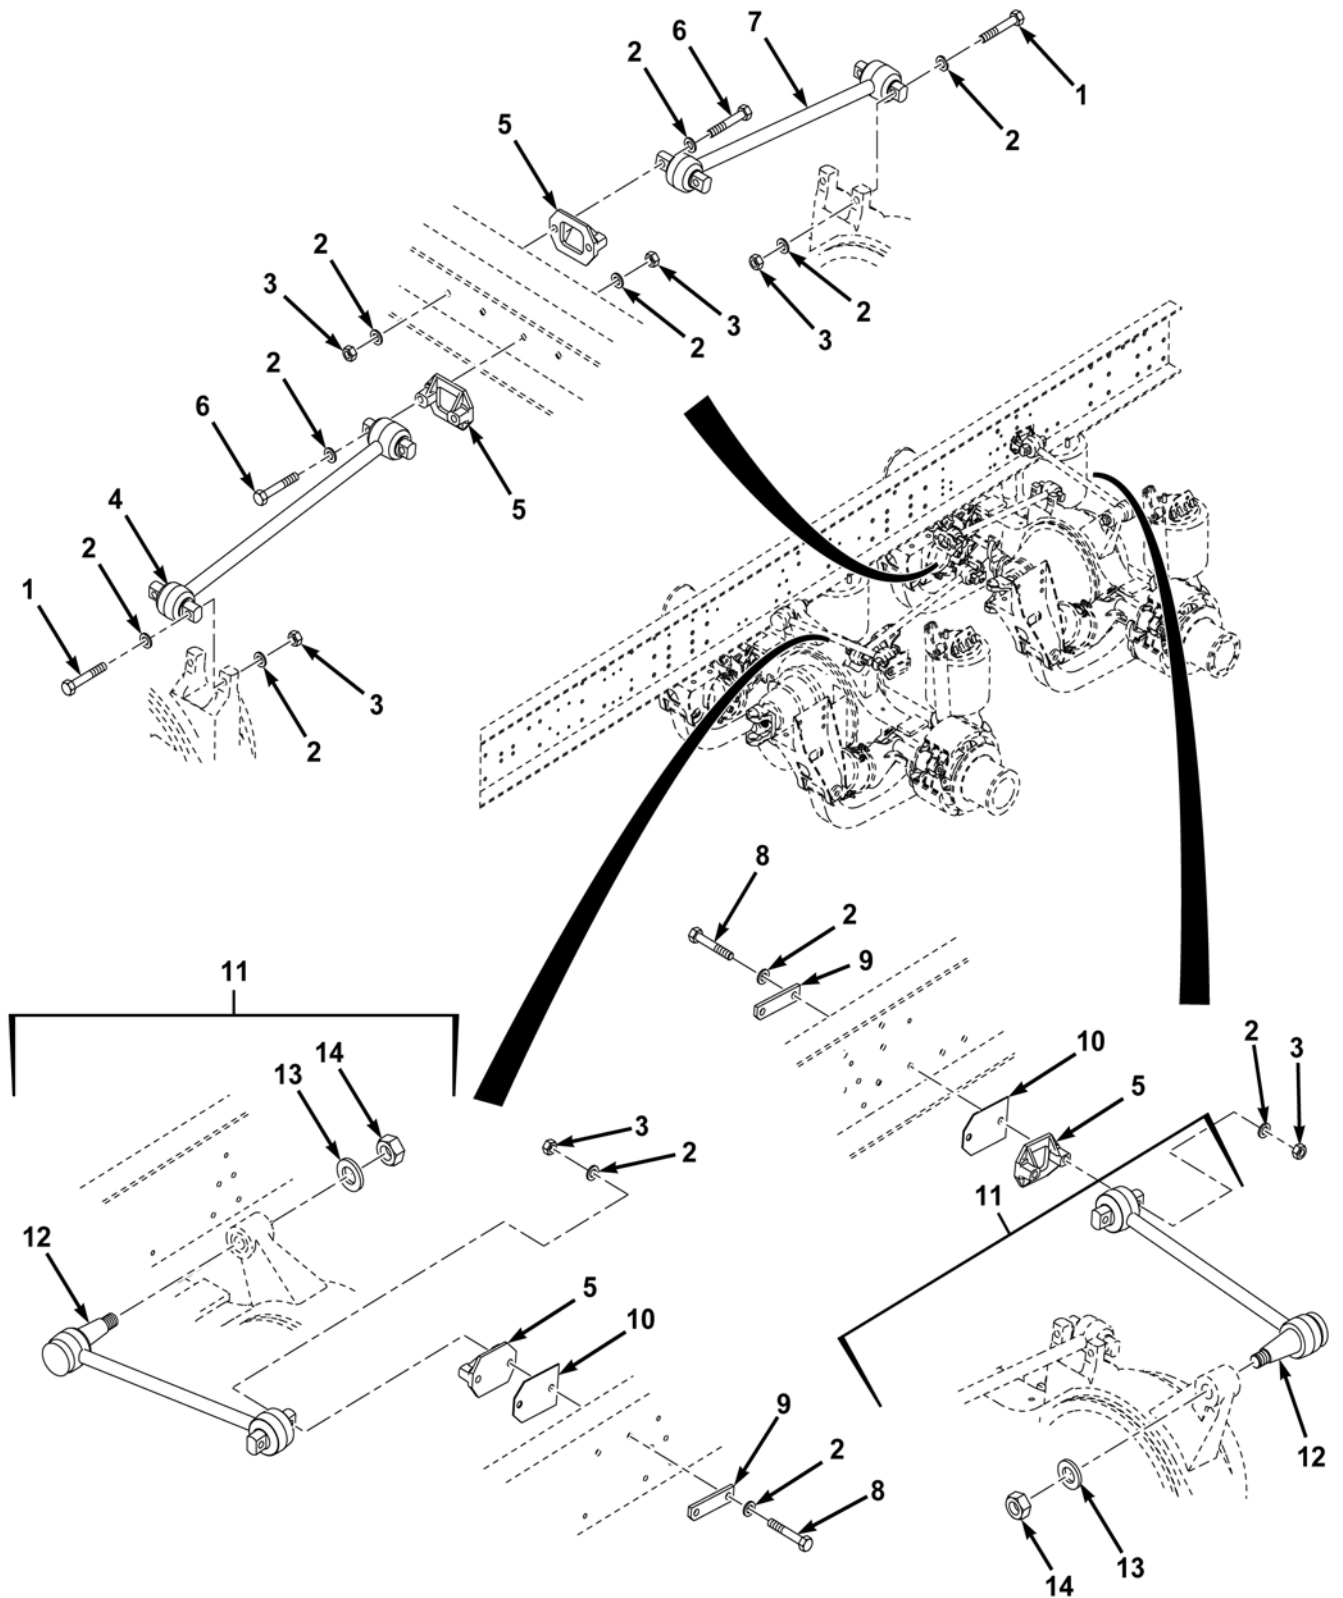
REAR SUSPENSION (SHEET 1 OF 2)
